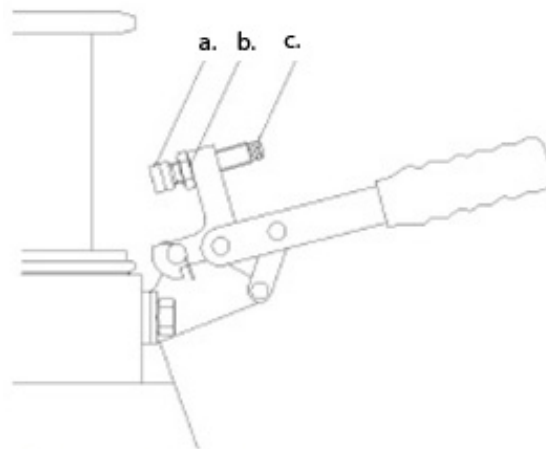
a. Clamp pad, b. Hex nut, c. Spindle
